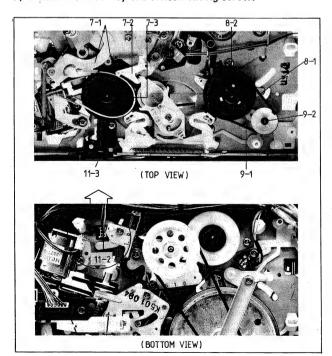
Reel Tables, Load Pulley, Reel Driver Idler Safety Tab Switch
